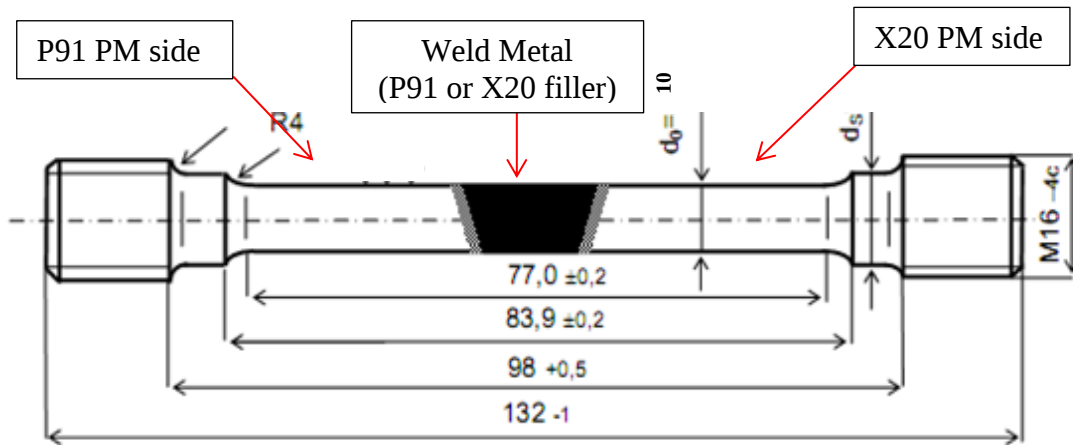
Schematic representation of a cross weld uniaxial creep test specimen showing the dimensional details in mm.
